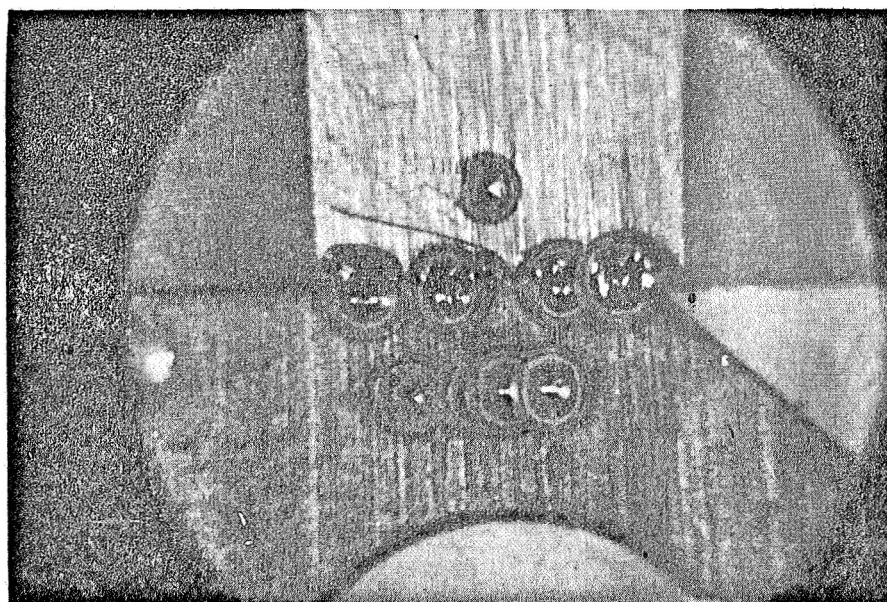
Group A Weld Sample 2 (20x mag.)
